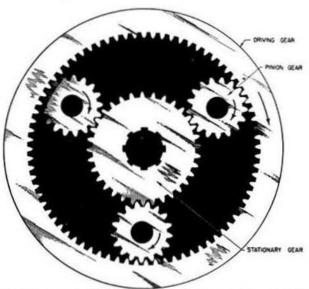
Spur planetary-system reduction gearing — rotating bell gear.
